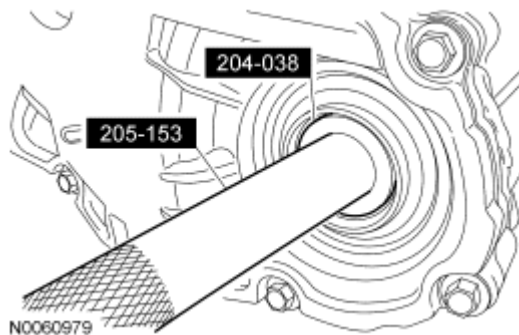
Identifying Intermediate Shaft Seal & Special Tools (204-038, 205-153)
